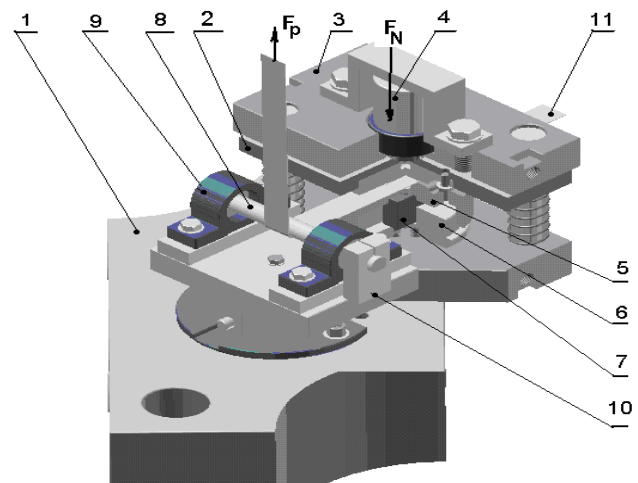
Model of friction simulator – strip drawing test. 1-base plate, 2-middle plate, 3-upper plate, 4-hydraulic clamping cylinder, 5-upper grip, 6-lower grip, 7- dynamometer for measurement of blankholding force, 8-roller, 9-ball bearings, 10- brake mechanism of the roller, 11-strip
